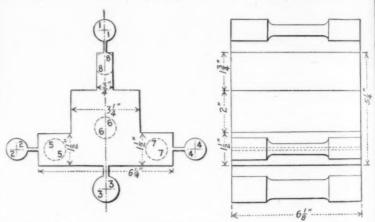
TEST BLOCK SHOWING DIMENSIONS AND NUMBERING OF TEST SPECIMENS.
